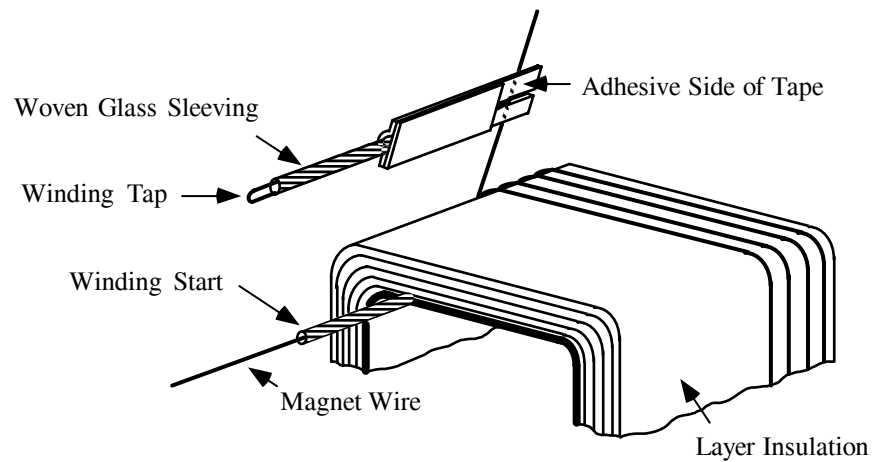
Tap Lead: Step 2, Showing the Compressed View, Using Sleeving.
